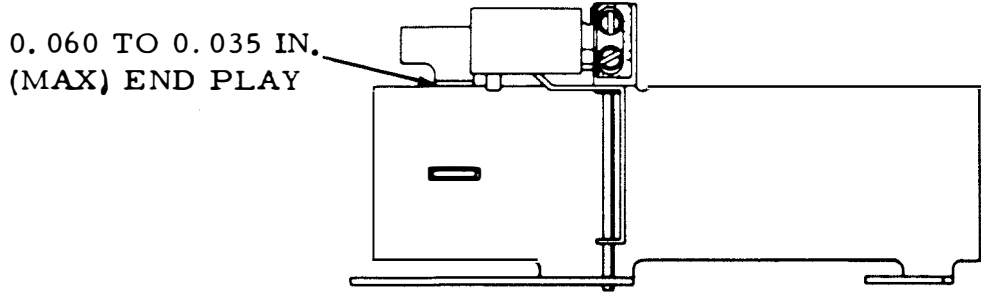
Tape Absence Contacts, Sensing Finger and Contacts Cable Assembly - Top View
